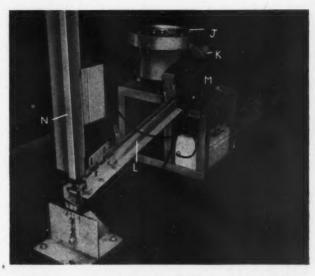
Close-up view of a typical feed unit, serving one of the Bryant machines, showing principal features. The demagnetizing head M is provided to ensure correct chucking and ejection on the machine
